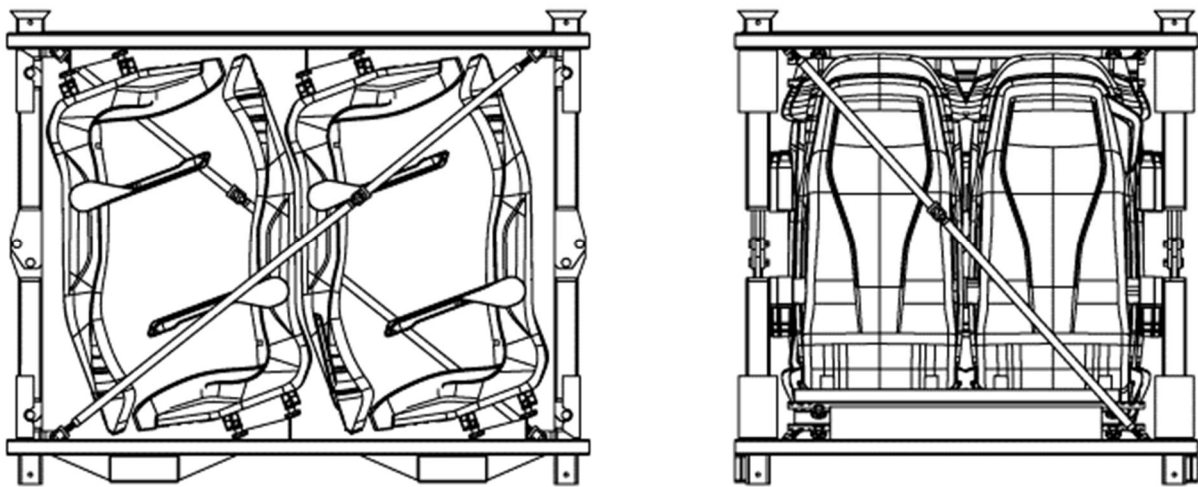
New reusable and foldable housing for seat assembly; 4 units of 2-seats version are contained.
